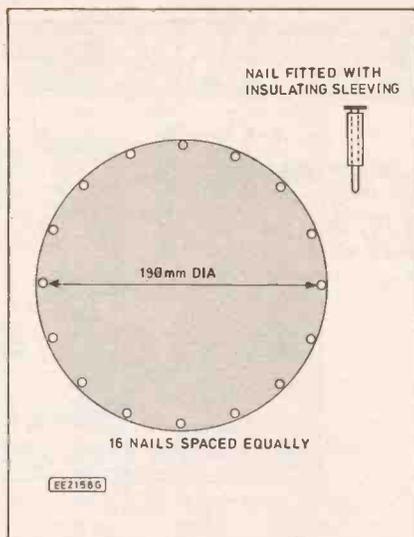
Making up a search coil template from a piece of wood with insulated panel pins nailed around the circumference.
